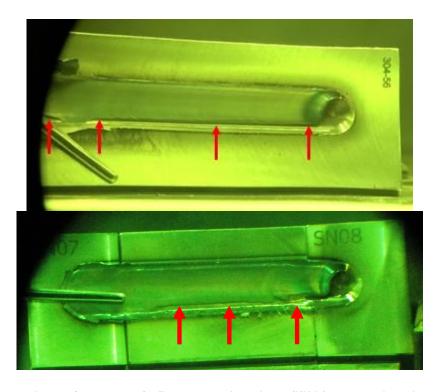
Excessive surface crack of FSW. Top: unirradiated SS304. Bottom: irradiated SS304.[3]
